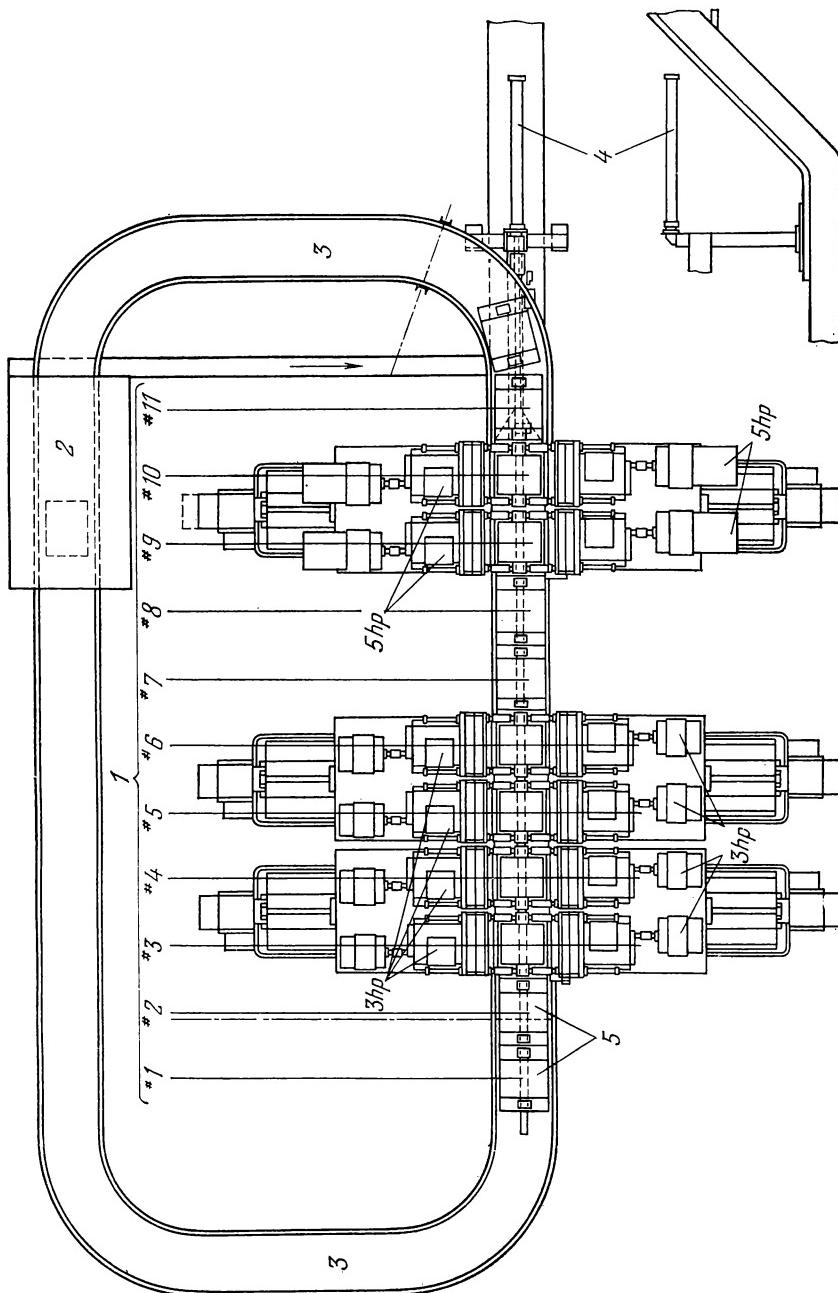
Six-station change-over transfer machine made by the Sundstrand Machine Tool Co. (USA) for machining housings of hydraulic units:
